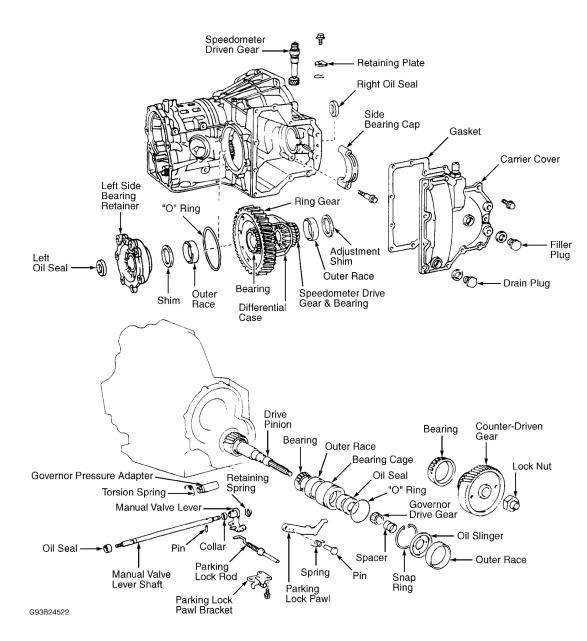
A-131L & A-132L Transaxle Differential Assembly Courtesy of TOYOTA MOTOR SALES, U.S.A. INC.
